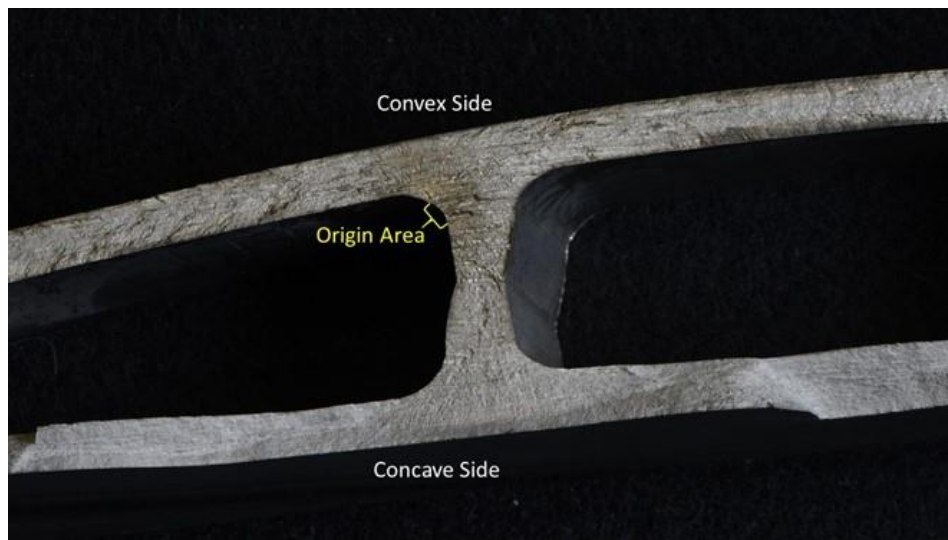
Hollow fan blade fracture surface area [1]
